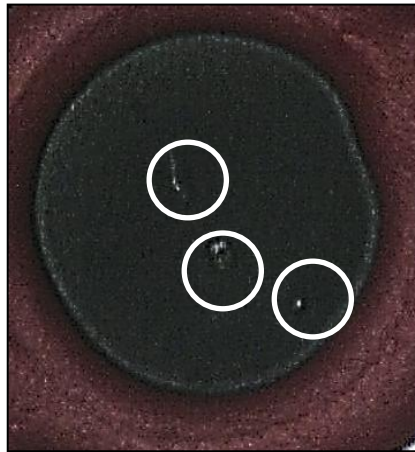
Exposed Ag on PCB (with Ag) and Electrodag carbon layer.
